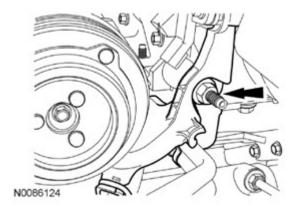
Locating Transmission Cooler Tube Support Bracket Nut Courtesy of FORD MOTOR CO.
